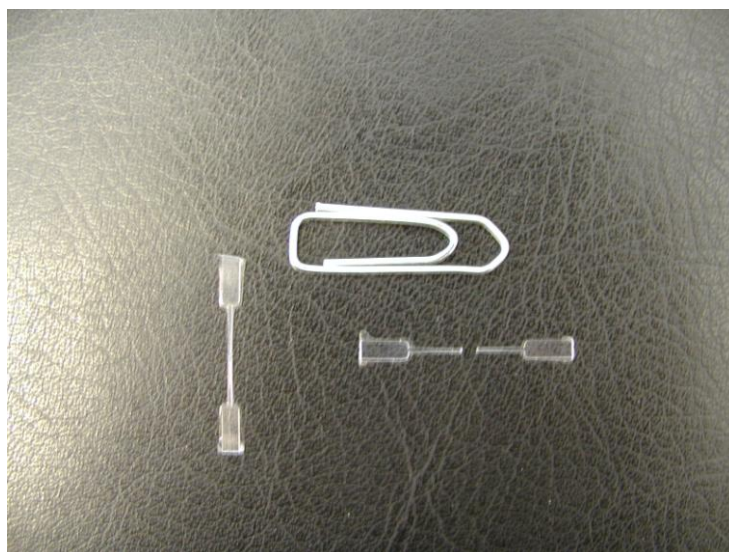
The micro injection molded tensile sample before and after tensile test
